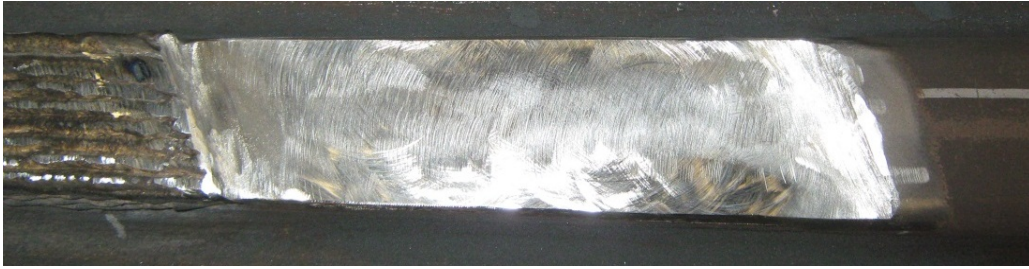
Frog #2 Wing Repair Welding Sequence
